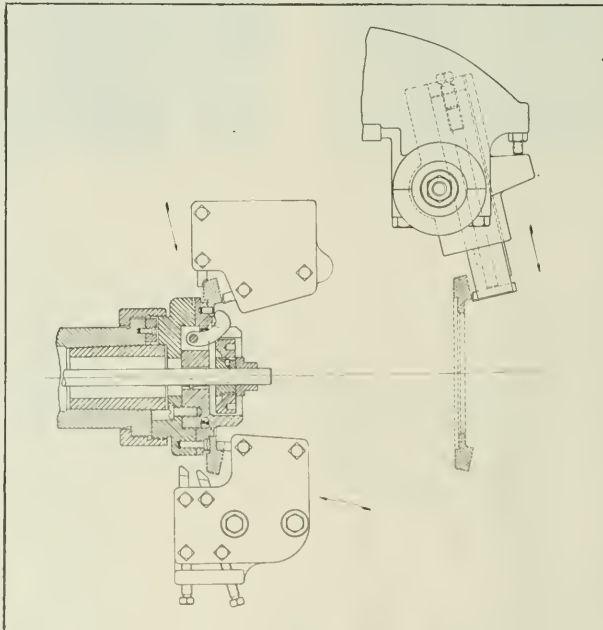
Example in which the Work is held on an Air-operated Fixture and driven by Dowels engaging Holes in the Web
